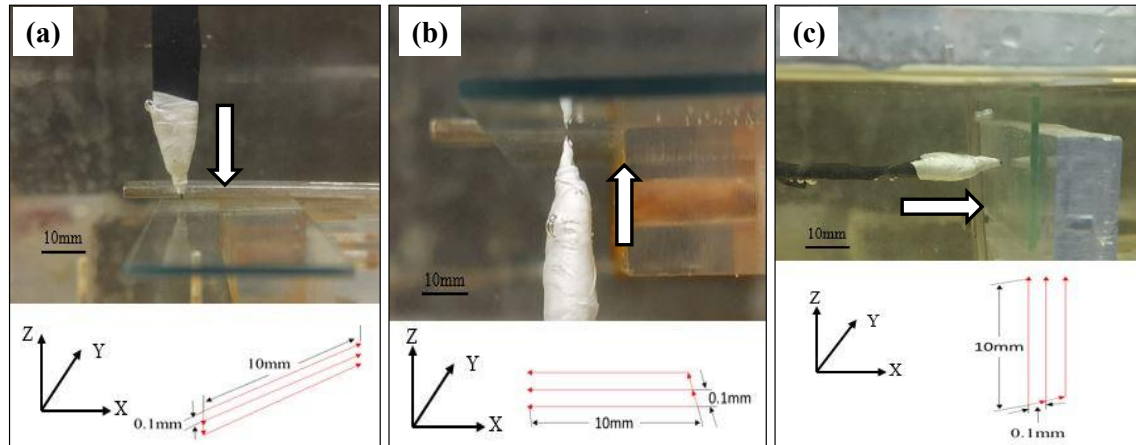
2 Positions of the tool-electrode and the workpiece for (a) existing tool feeding, (b) bottom tool feeding, (c) upward tool feeding with horizontal tool
